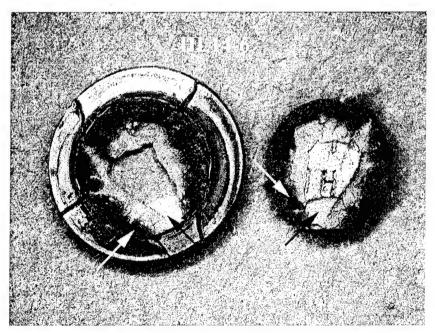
Increased Magnification of the Mating Fracture Surfaces of Fastener HL14-6's Head Failure. The white arrows identify a blackened fracture surface (believed to be caused by acid penetration into a crack). A clean metallic fracture surface (no acid penetration) is shown by the black arrows.
